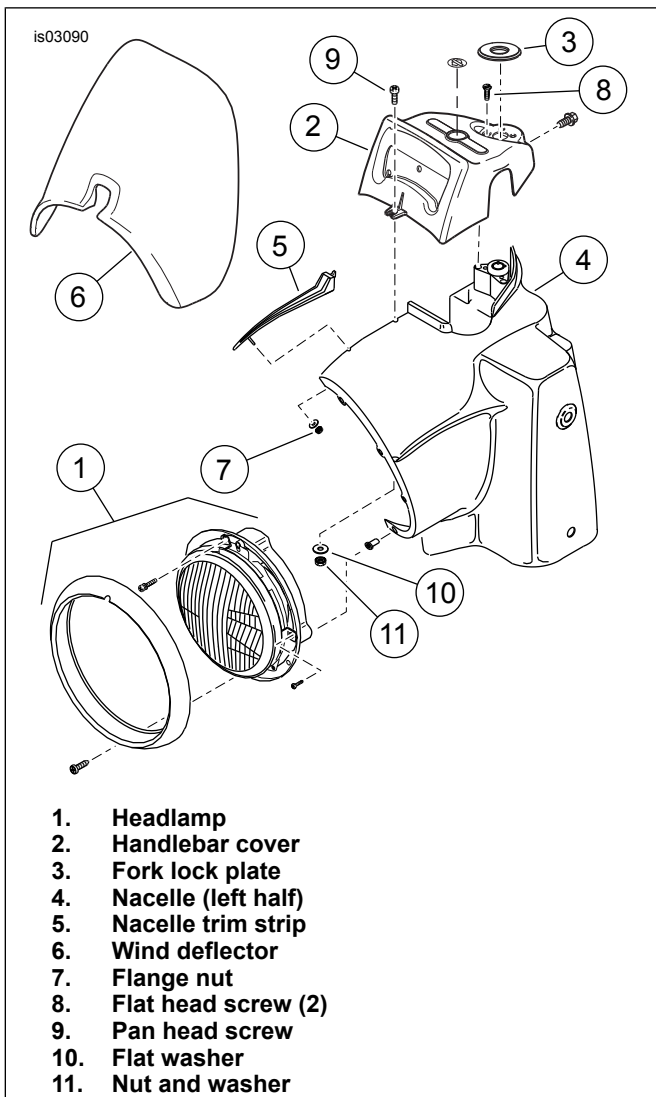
Nacelle, Headlamp and Handlebar Cover (FLHRS Models)
